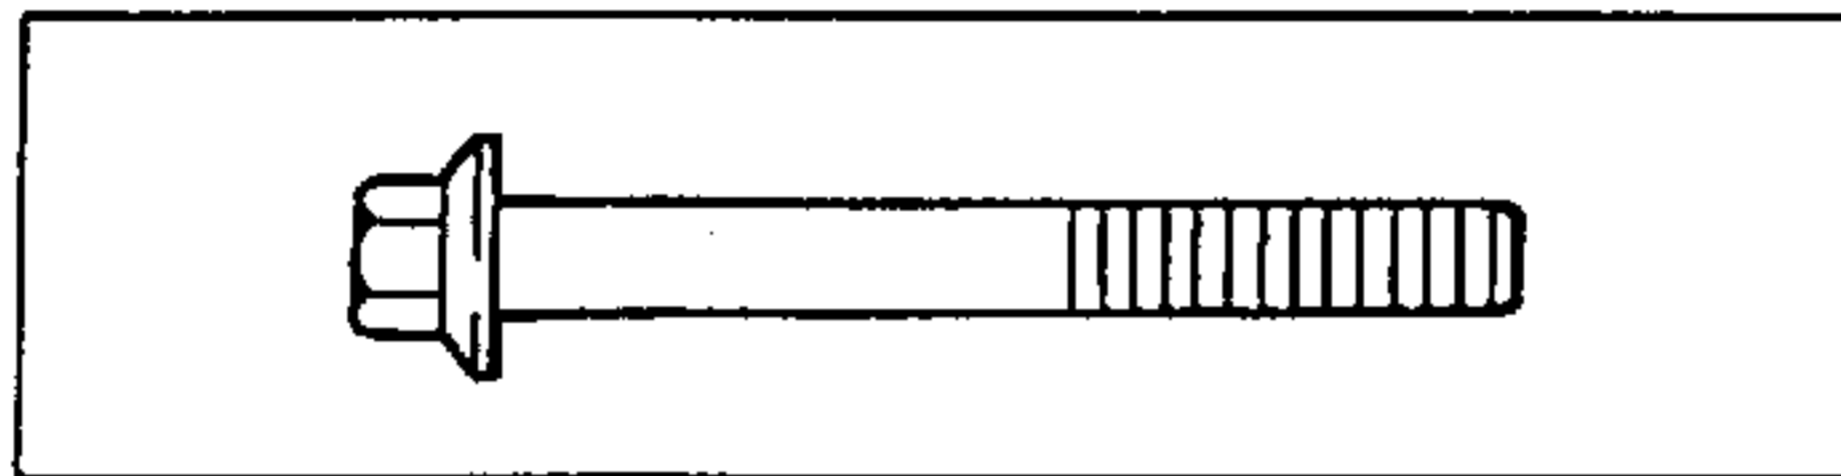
Straight Shank 8mm Type Connecting Rod Bolt.
